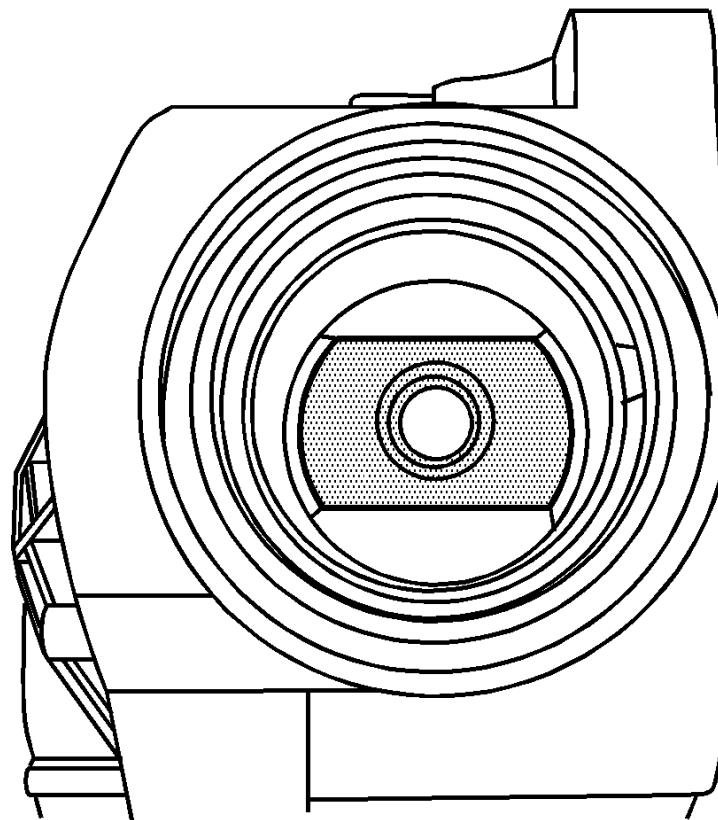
J 45858-5 Into Pinion Bearing Bore
